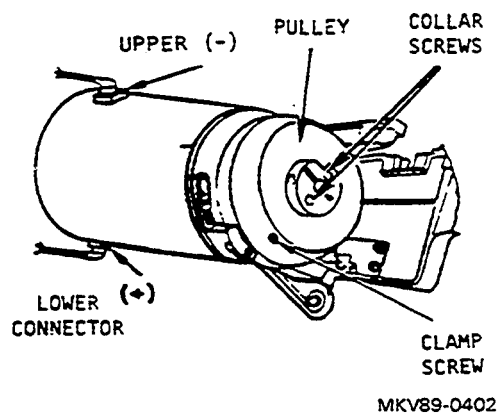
Disconnecting the Upper and Lower Wire Connectors from the Band Drive Motor
